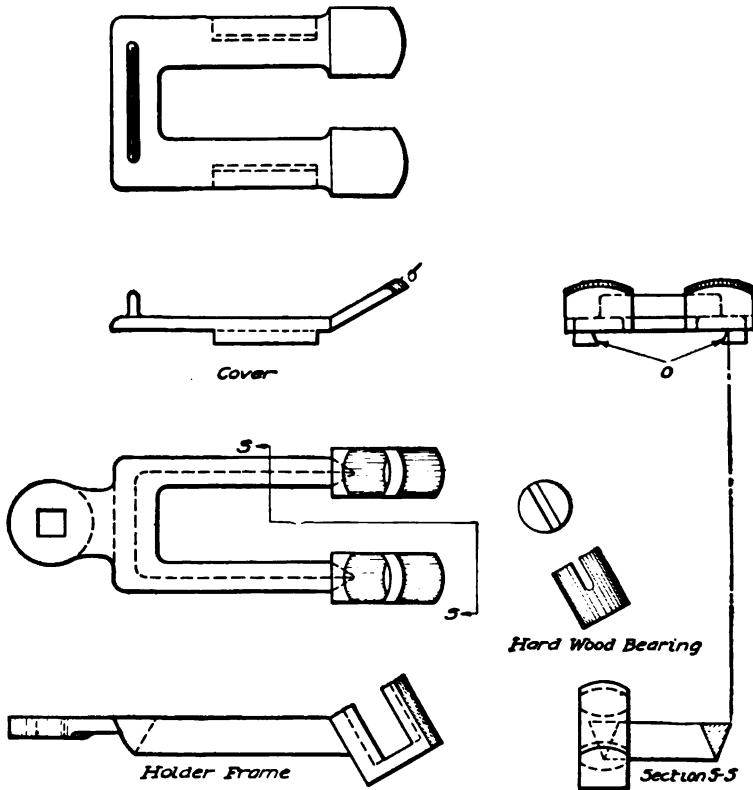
Working Drawing of Holder Frame that Requires Side Draw
